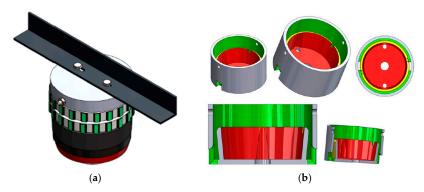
TSAL beacon: (a) assembly and (b) bottom section.
